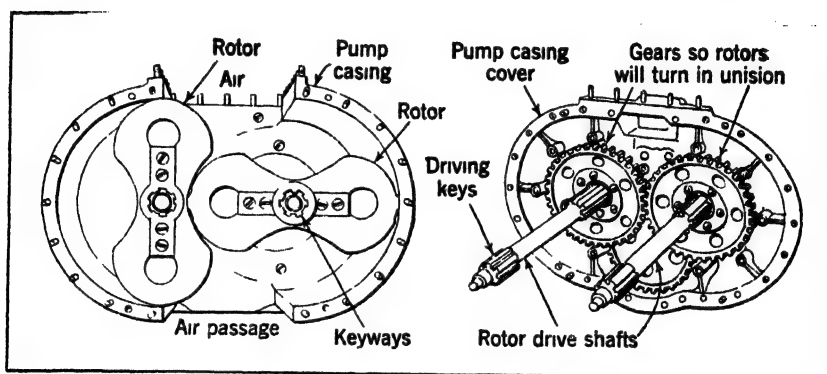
Interior of Roots Type Supercharger. The Driving Gears and Shaft of the Rotor are Shown at the Right. Note the Mesh of the Rotor and the Contour which Differs from that of the Customary Commercial Roots Blower, as Outlined at the Left of the Illustration.
